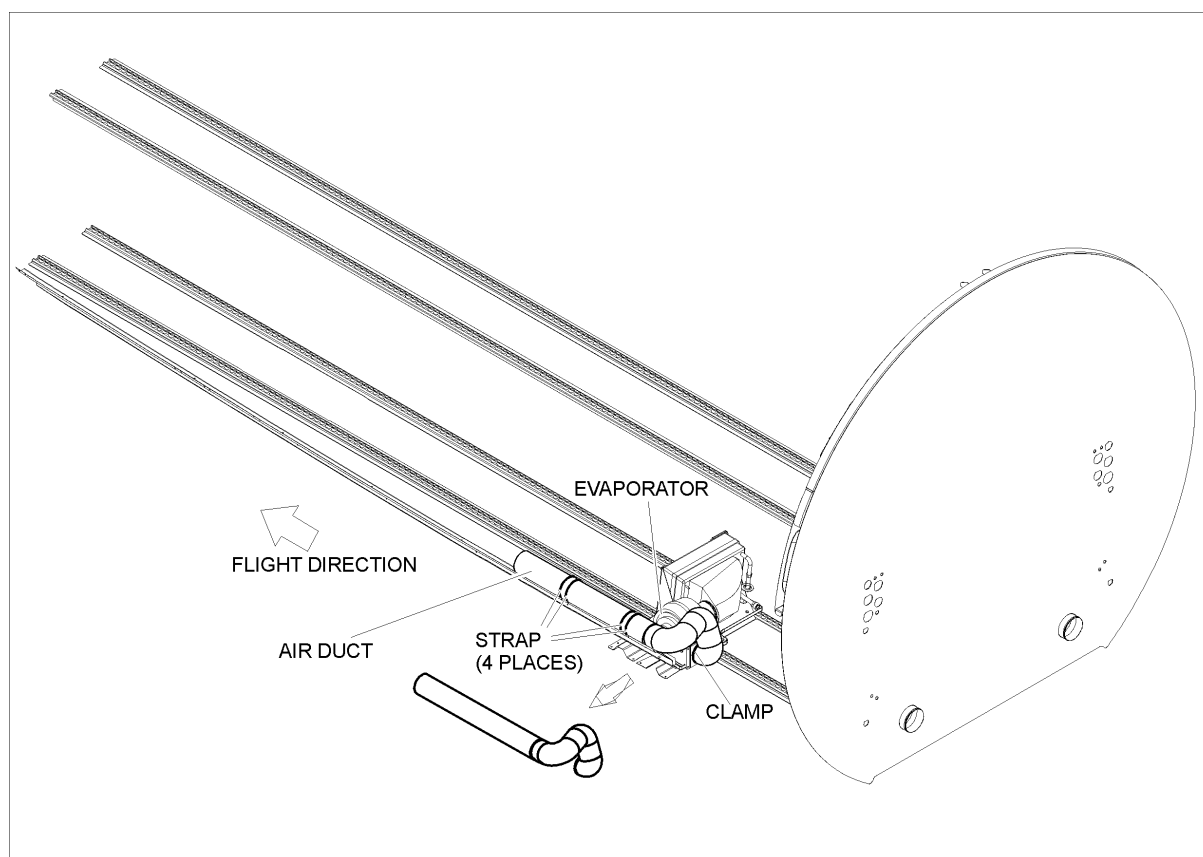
Evaporator Air Duct (Ferry Flight Configuration) - Removal
